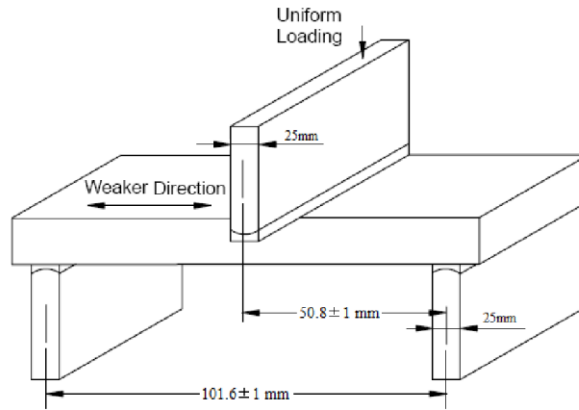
Certain Aircraft Floor Panels Shearing Test Schematic Drawing
